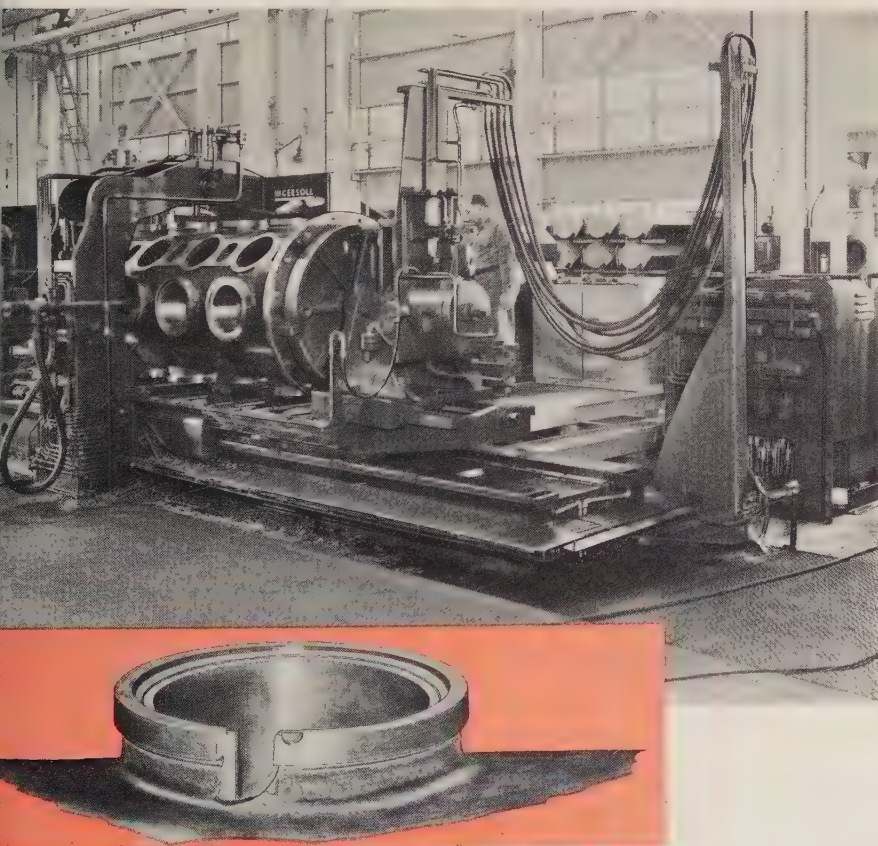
The turning, boring, counter-boring, under-cutting, and taper-facing required on the inner and outer surface of each cylinder attaching flange (inset) are performed in 1 operation on a machine specially designed for this purpose.
